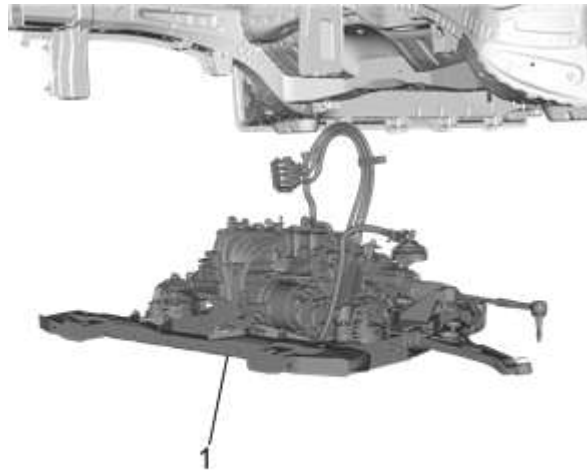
Automatic Transmission and Drivetrain and Front Suspension Frame Assembly
